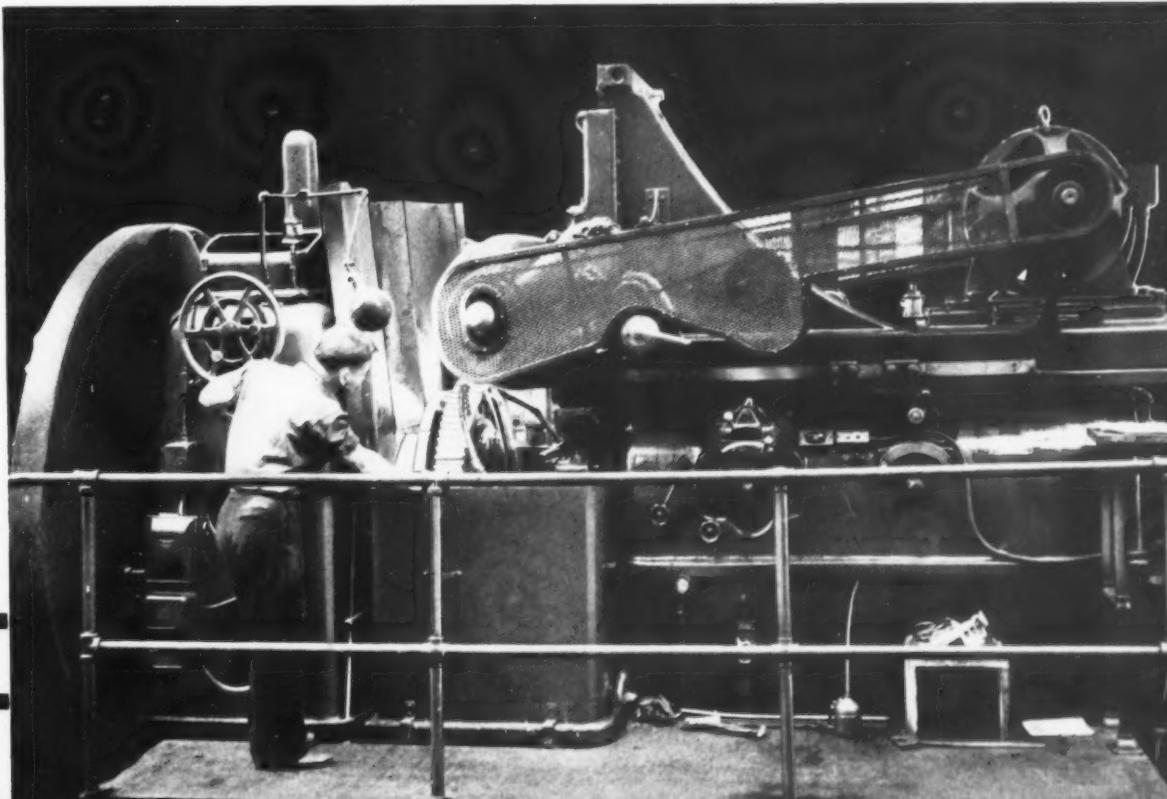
Close-up View of a Typical Operation Performed on the Large Gear-tooth Grinding Machine Shown in Fig. 14
